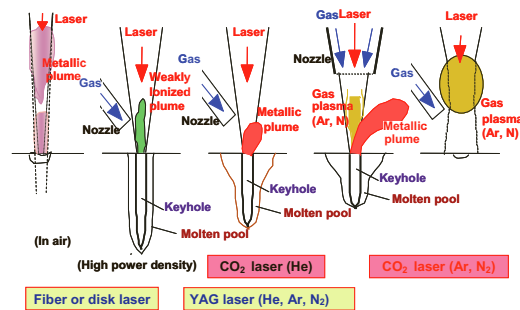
Schematic illustration of plume and plasma behaviour and consequent keyhole and/or melting in laser welding.
